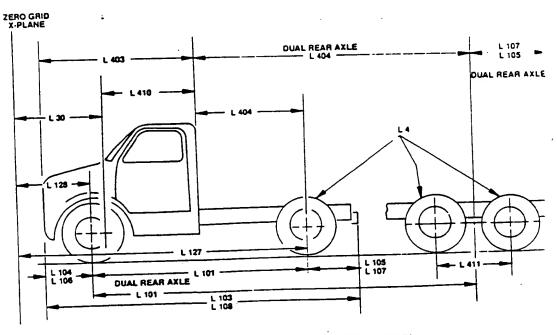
TRUCK EXTERIOR DIMENSIONS, LENGTH
